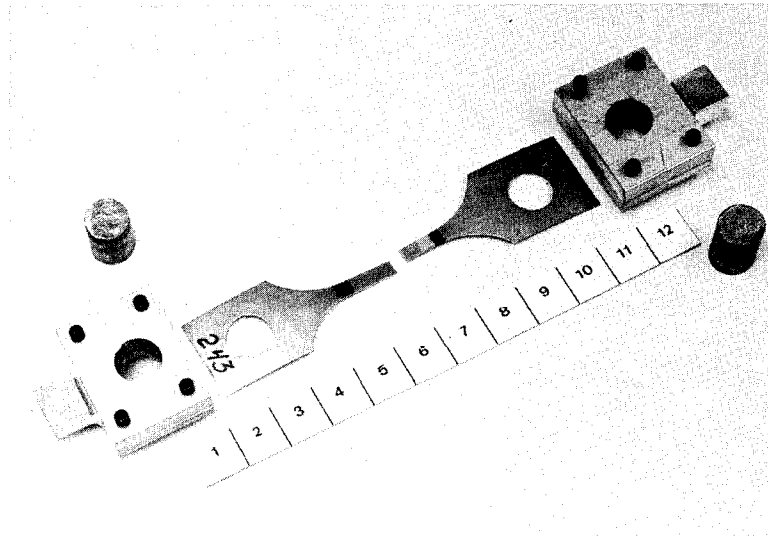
TEST SPECIMEN AND SPECIAL GRIPS
